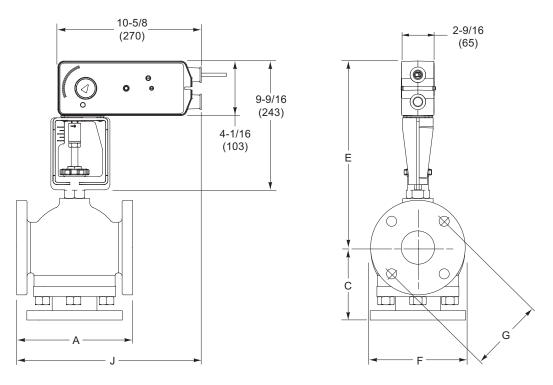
Mx61-720x with 2-1/2" to 4" 3-Way VB-9313 Flanged Globe Valve.
